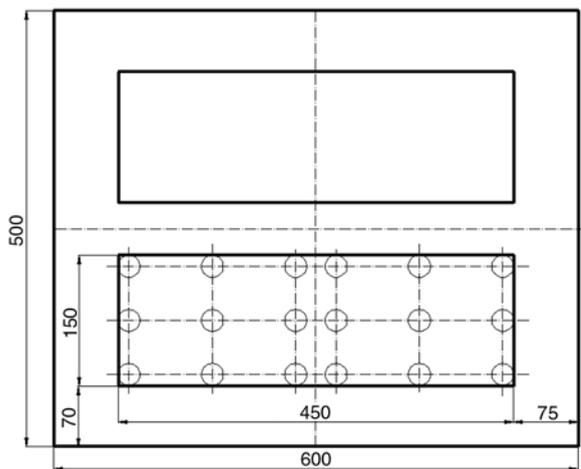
Outline of the arrangement of the test mould and the 18 measurement spots
